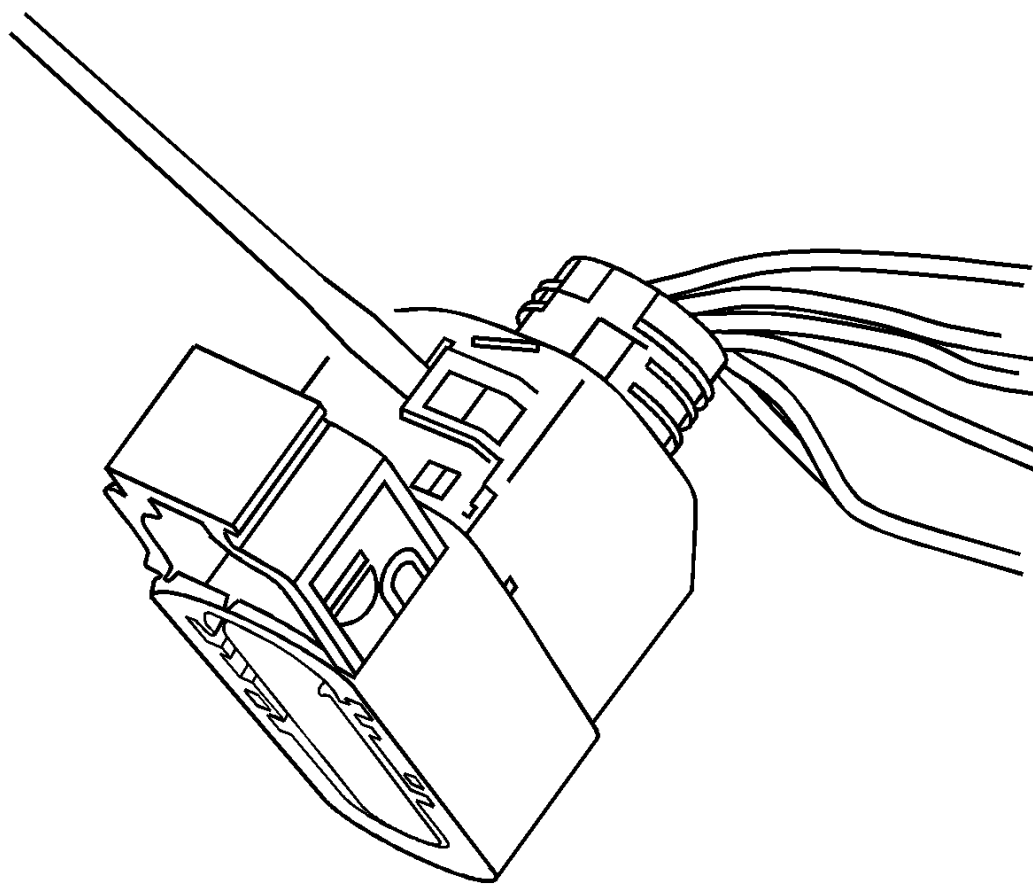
Identifying Lower Wire Dress Cover Locking Tab
